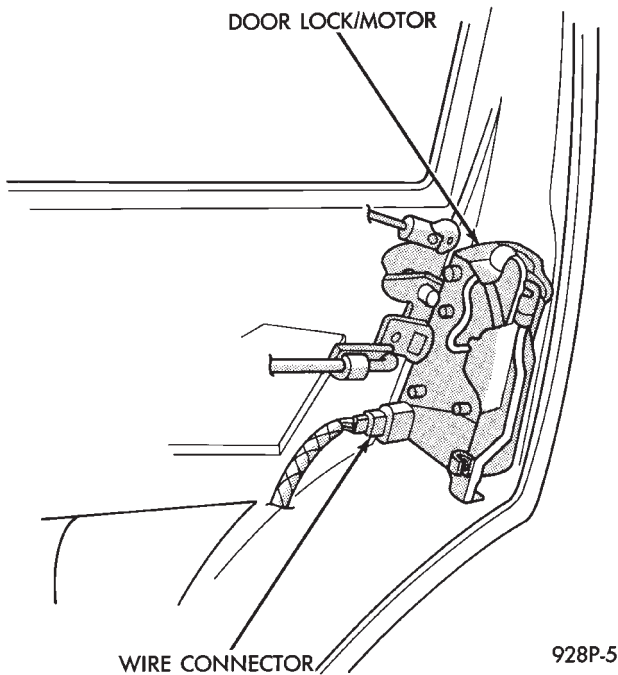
Rear Power Door Lock Motors – AC and AY Bodies
